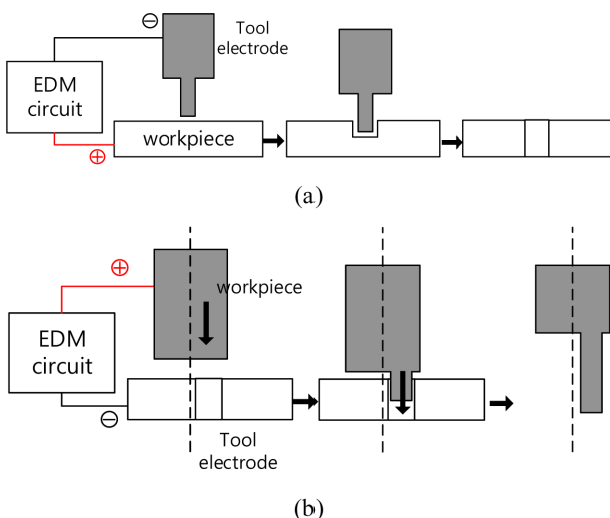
Process for eccentric micro tool electrodes (a) Machining of micro hole (b) Fabrication of an eccentric tool⁹
